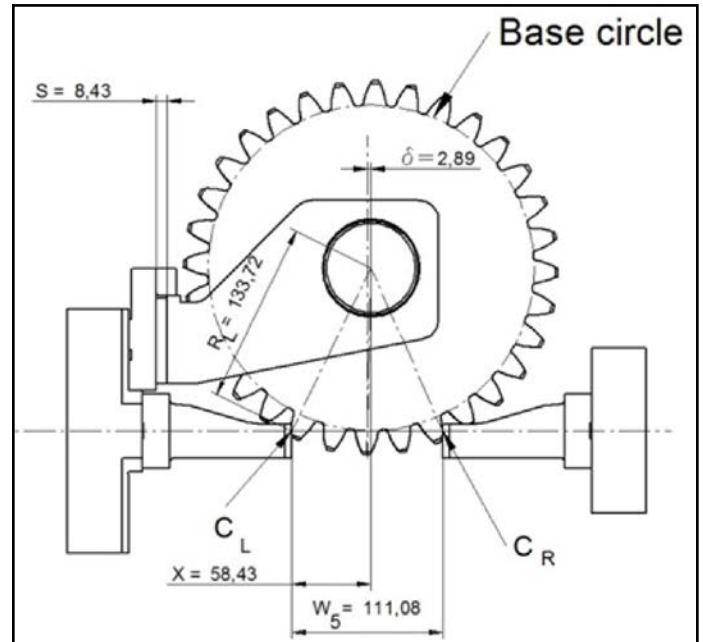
Bending fatigue test apparatus: main dimensions of rig and gear.
